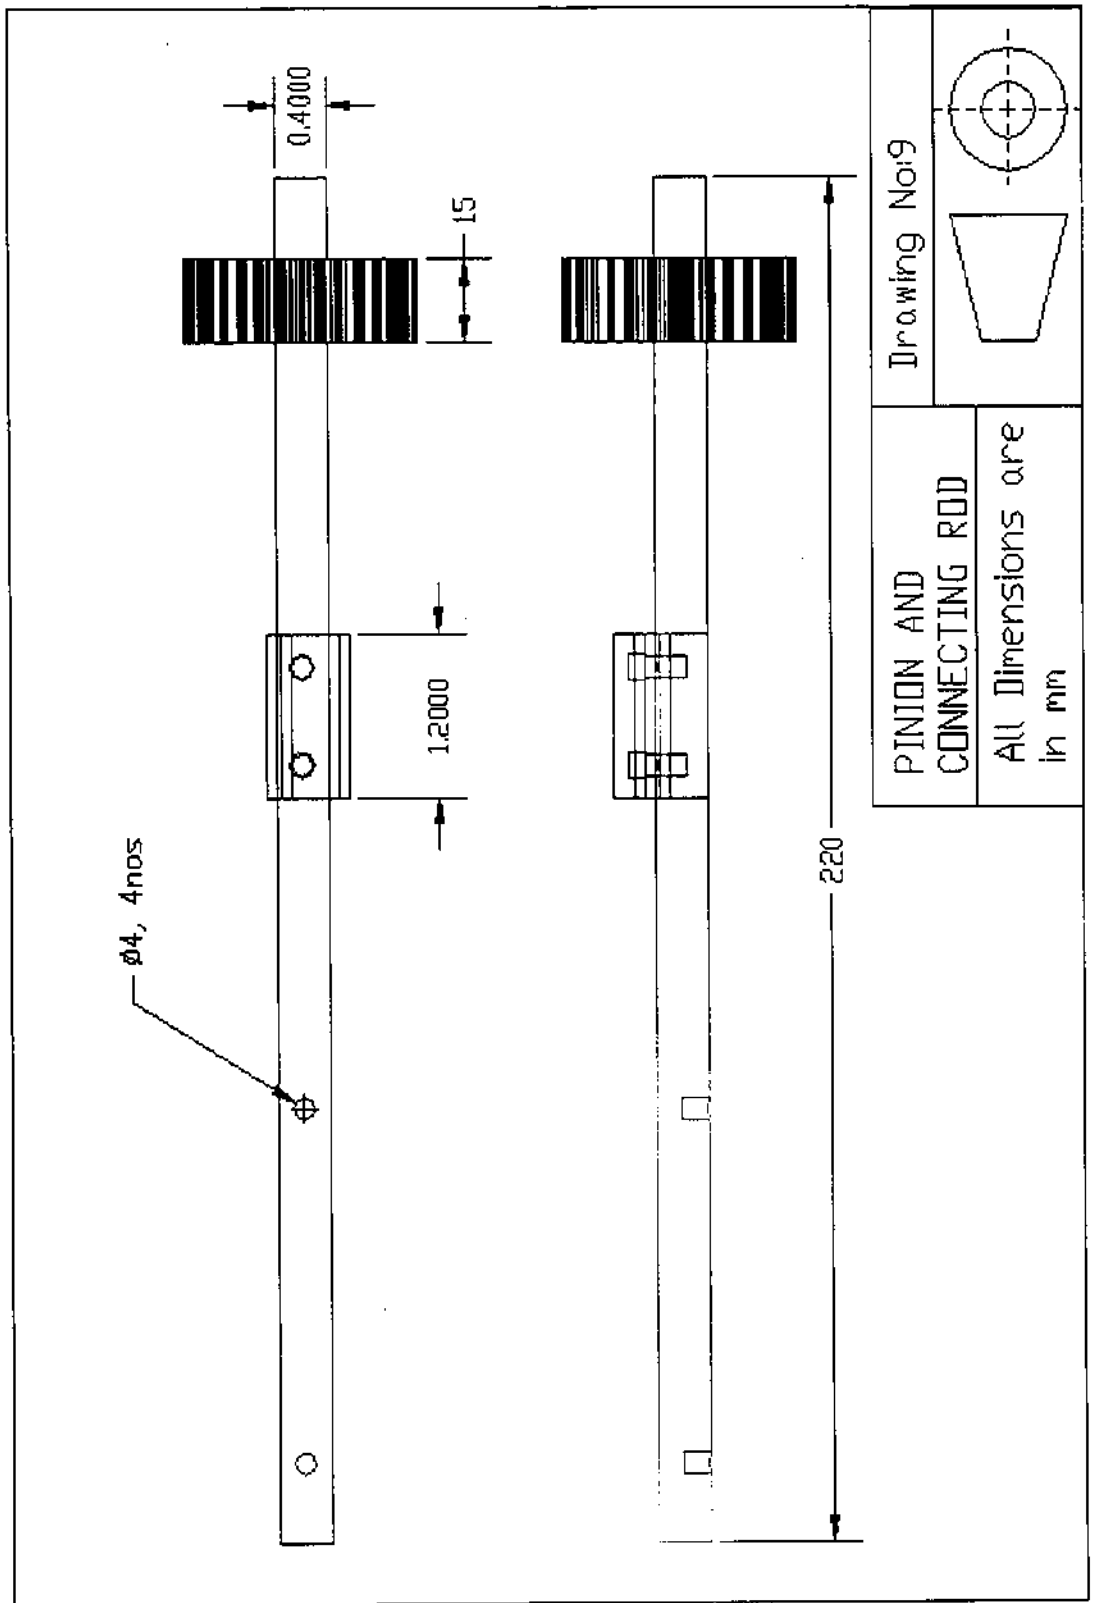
PINION AND CONNECTING ROD DRAWING
